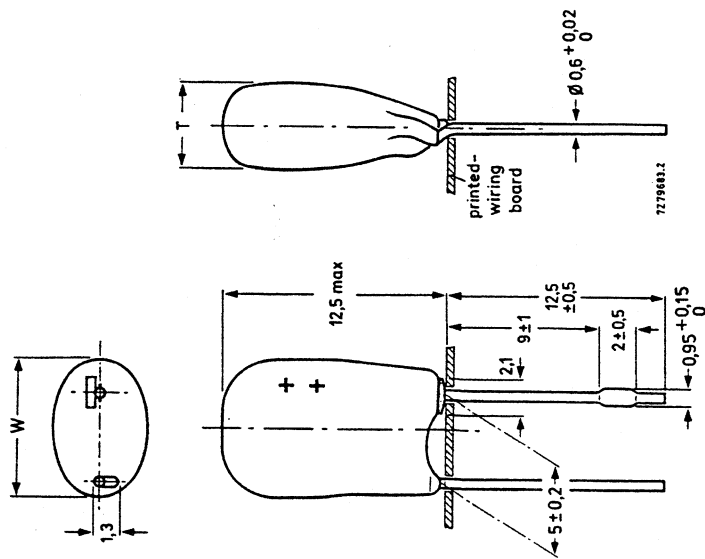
Style 2; see Table 3 for dimensions T and W.
